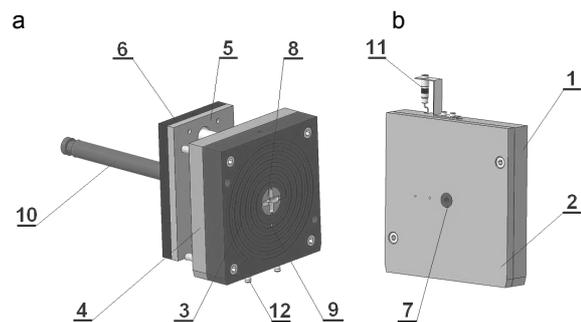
Cavity parts of the injection mold for thermoplastics a) left side, b) right side; 1 – clamping plate, 2 – testing plate, 3 – cavity plate, 4 – plate, 5 – anchor plate, 6 – ejector plate, 7 – sprue puller insert, 8 – special sprue puller, 9 – ejector, 10 – ejector rod, 11 – pressure sensor, 12 – cooling end
